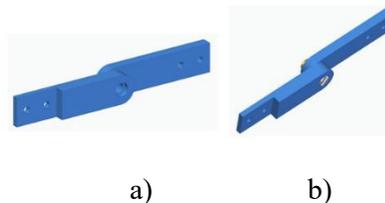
The CAD model for: a) Passive joints; b) Mechanical link between the passive joints created by positioning the bolted joint through the existing holes
